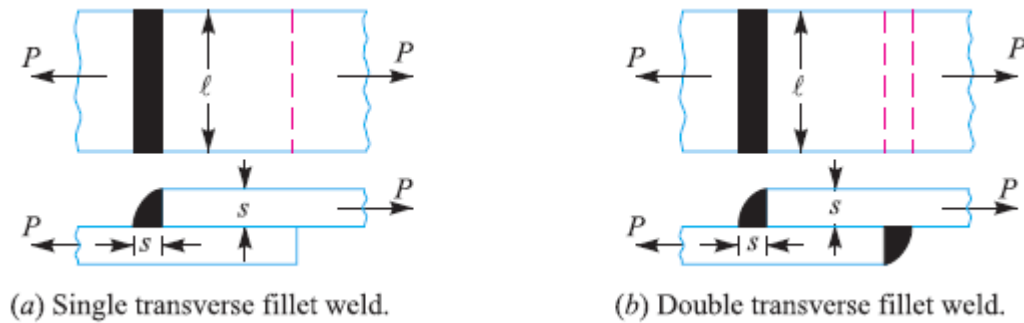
Fillet Weld Joint Nomenclature
